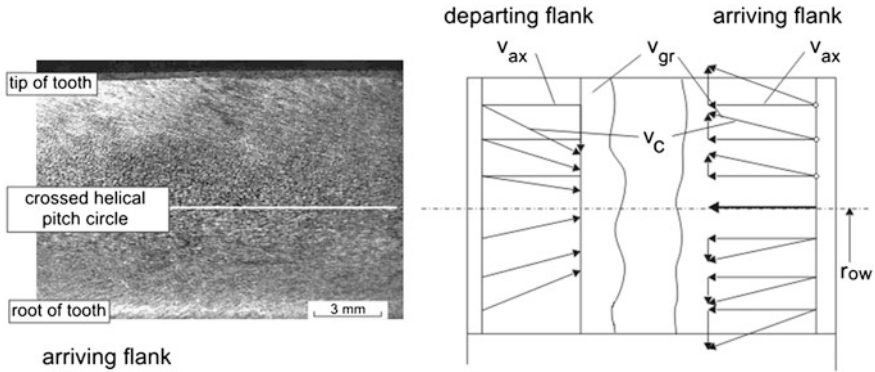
Cutting speeds and grinding grooves in crossed helical grinding
